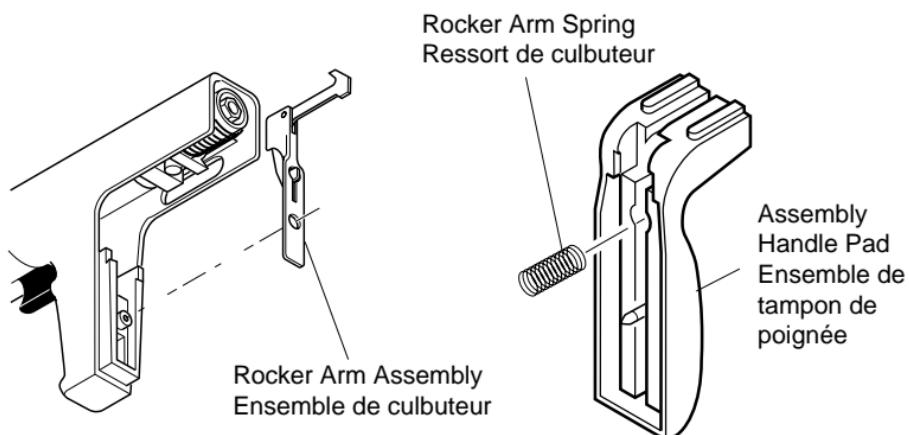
Removing Handle Pad Assembly and Rear Pad
